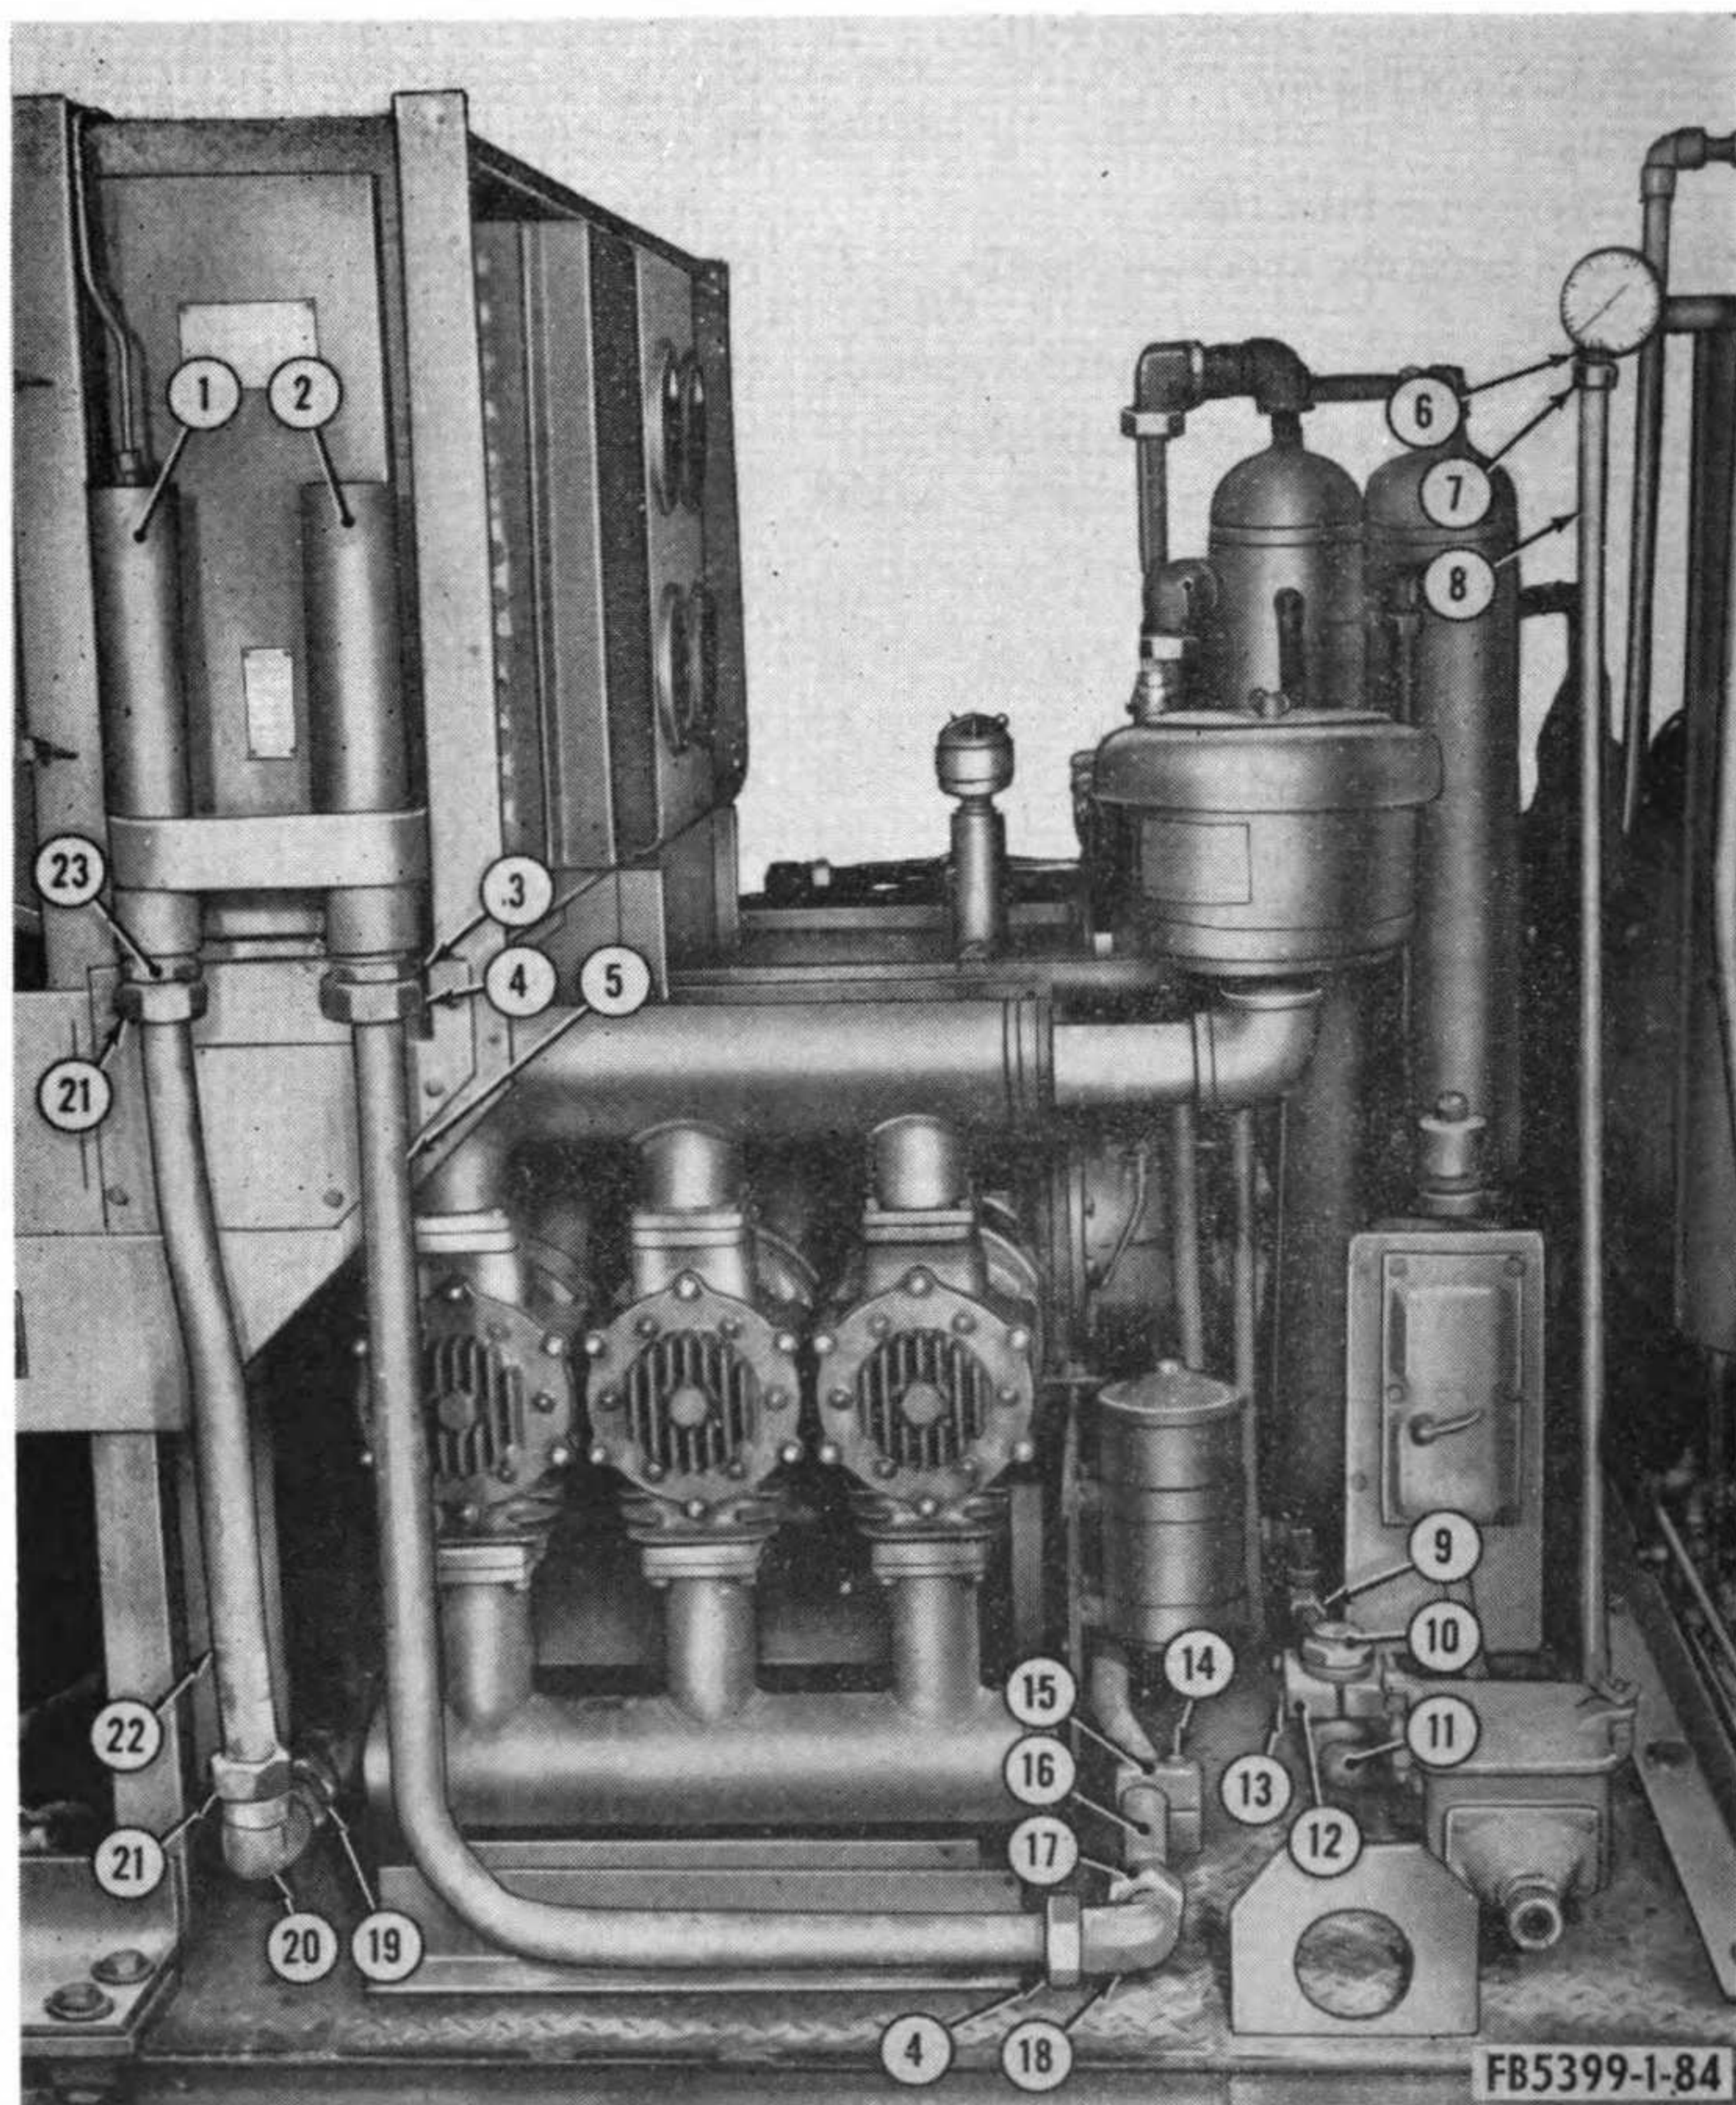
Pressure-retaining valve check valve, and compressor piping removal and installation points.
